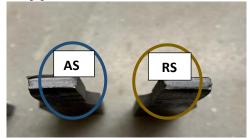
Fracture of concave shouldered MX-TRIFLUTE tensile specimen at 1400 rpm
